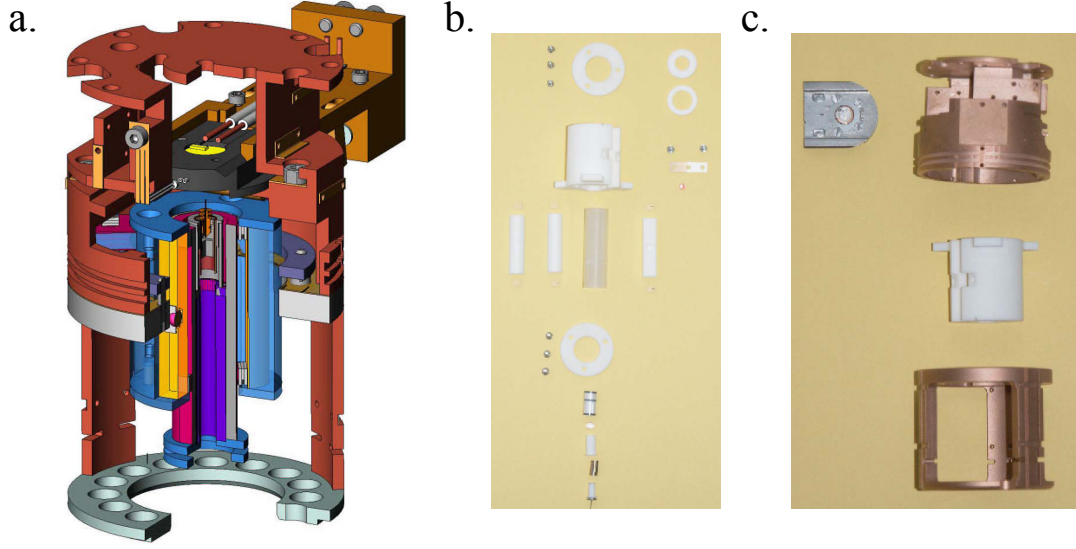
a. Cross-section view of a 3D model of our STM, with sample-holder and manipulator head. b. Disassembled STM head. c. Sample-holder (top-left corner), STM cage (top-right and bottom) and STM body (middle).
